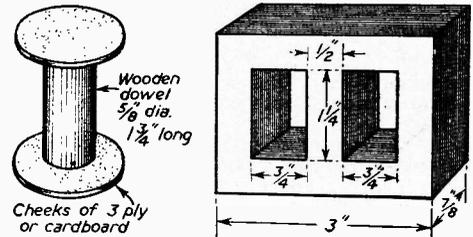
(Left).—The choke former. Fig. 3. (Right).—Transformer core.
